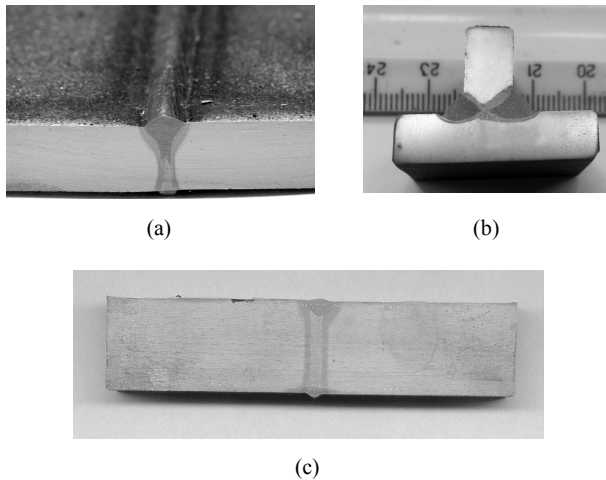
Macrosections of hybrid laser-arc welding joints: butt-joint 7 mm (a) and 20 mm (c) thickness, T-joint 7mm/7mm thickness (b)
